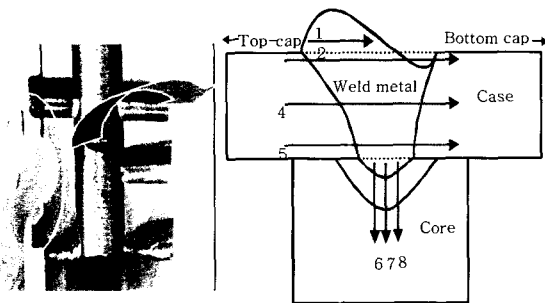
Cross section of arc-spot weldment for hardness test
